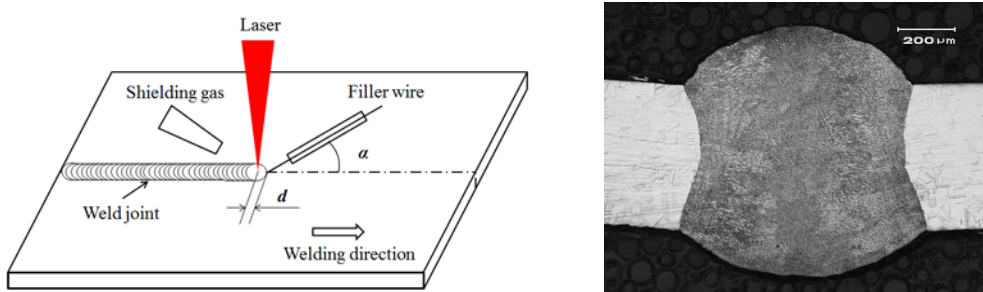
Laser welding with filler wire (a) experiment device schematic; (b) the weld cross section morphology
